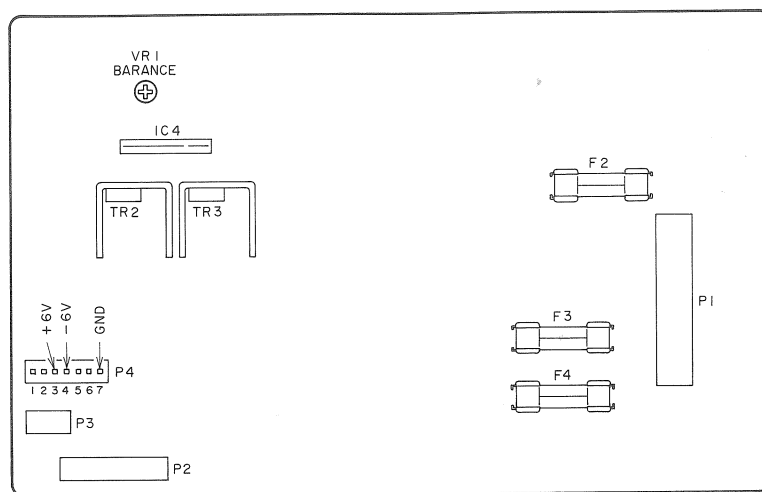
POWER SUPPLY PCB Adjustment Points
